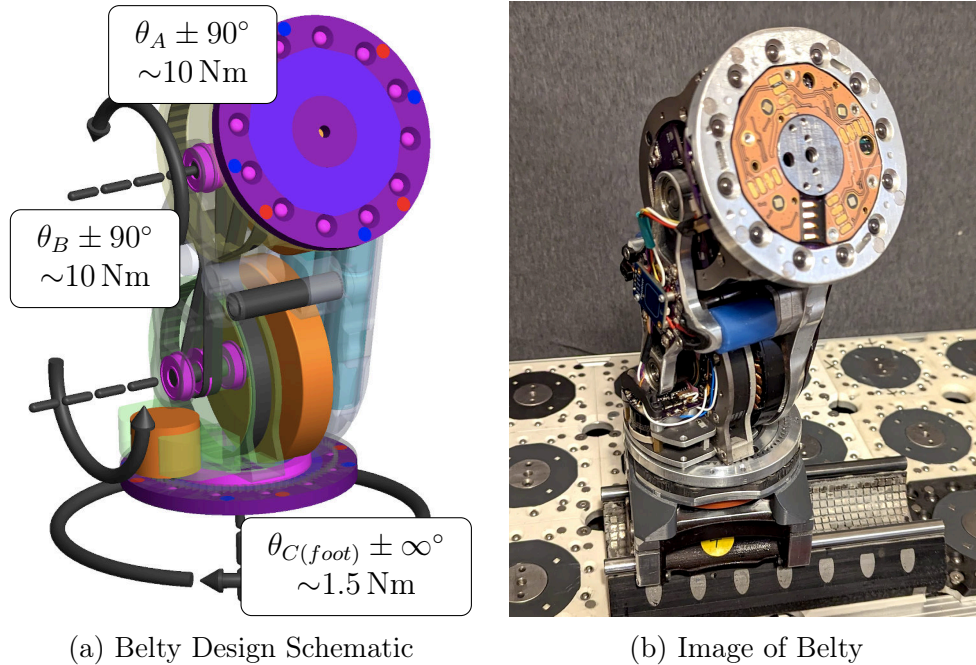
Image (b) and 3D sketch (a) of Belty the assembler robot, with *orange* representing the motors, *gray* showing belts and gears, *pink* showing bearings, and *purple* representing the modular connectors. Belty has three actuated degrees of freedom, and four independently moving assemblies.
